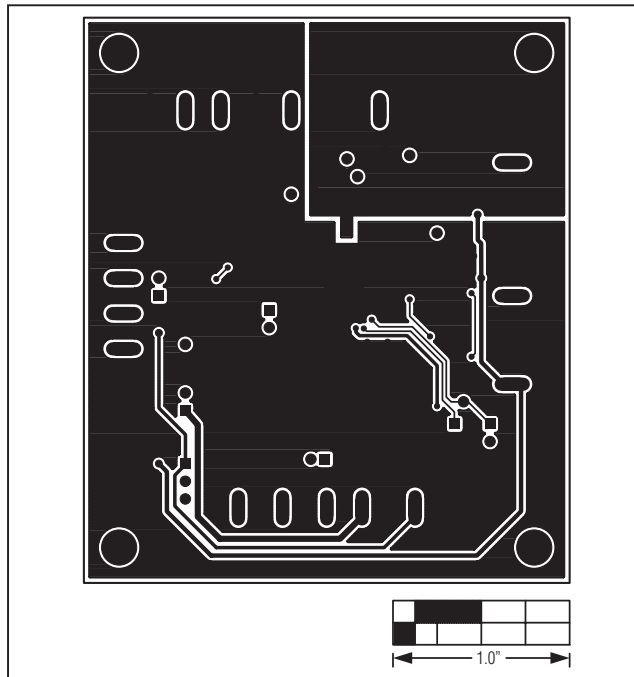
MAX17114 EV Kit PCB Layout—Solder Side
